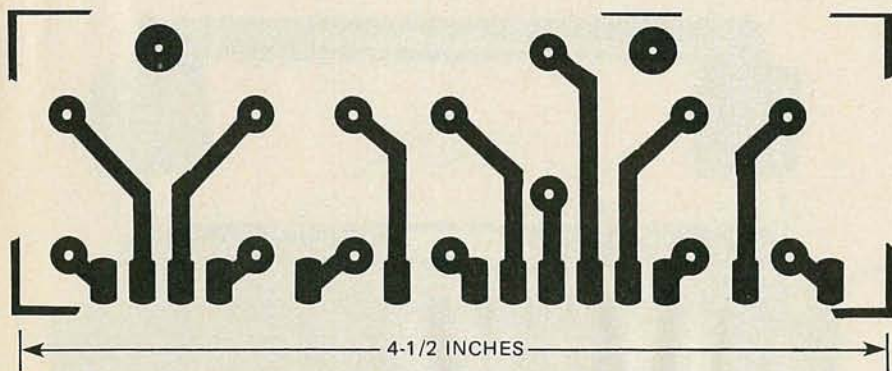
THE FOIL PATTERN for the CODE board is shown here full size.
